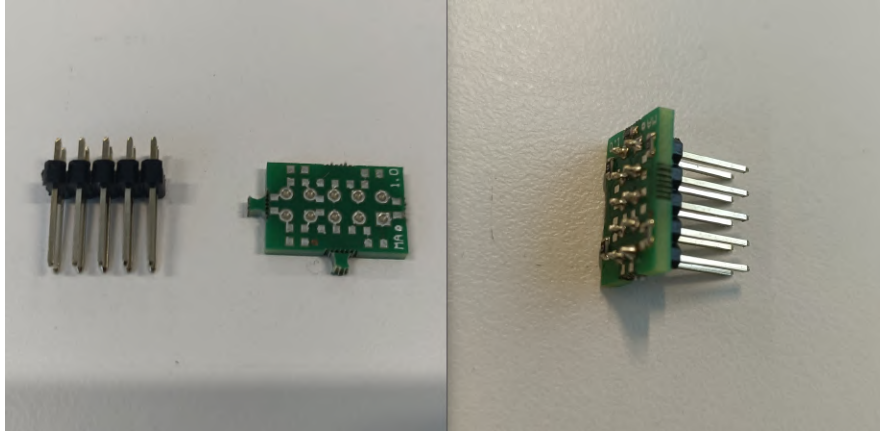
Circuit board for the SMD components. On the right another example of the board with pins already soldered.
